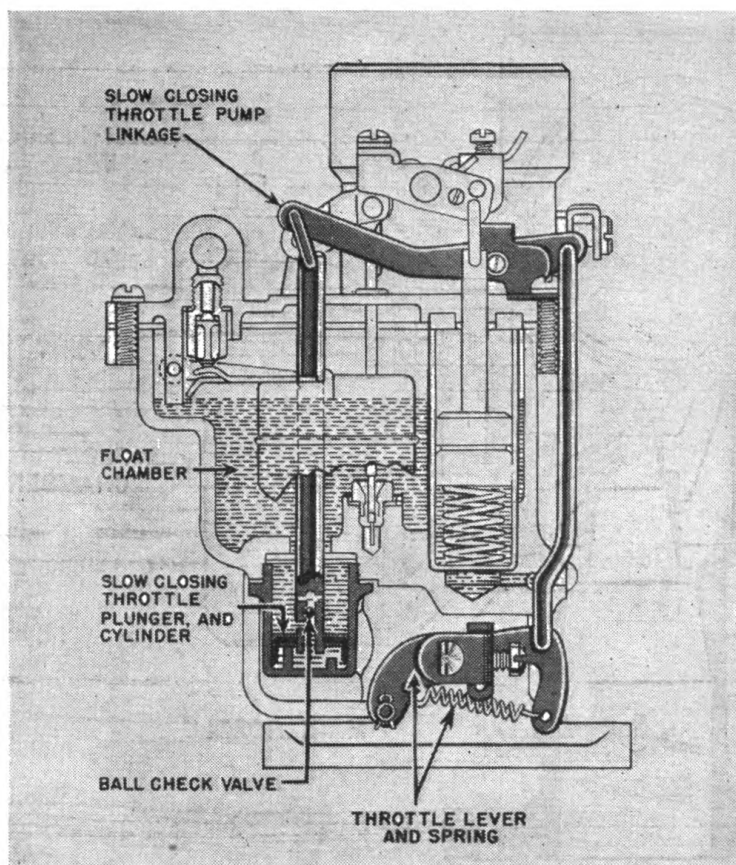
Slow closing throttle device in a metering rod type carburetor.
